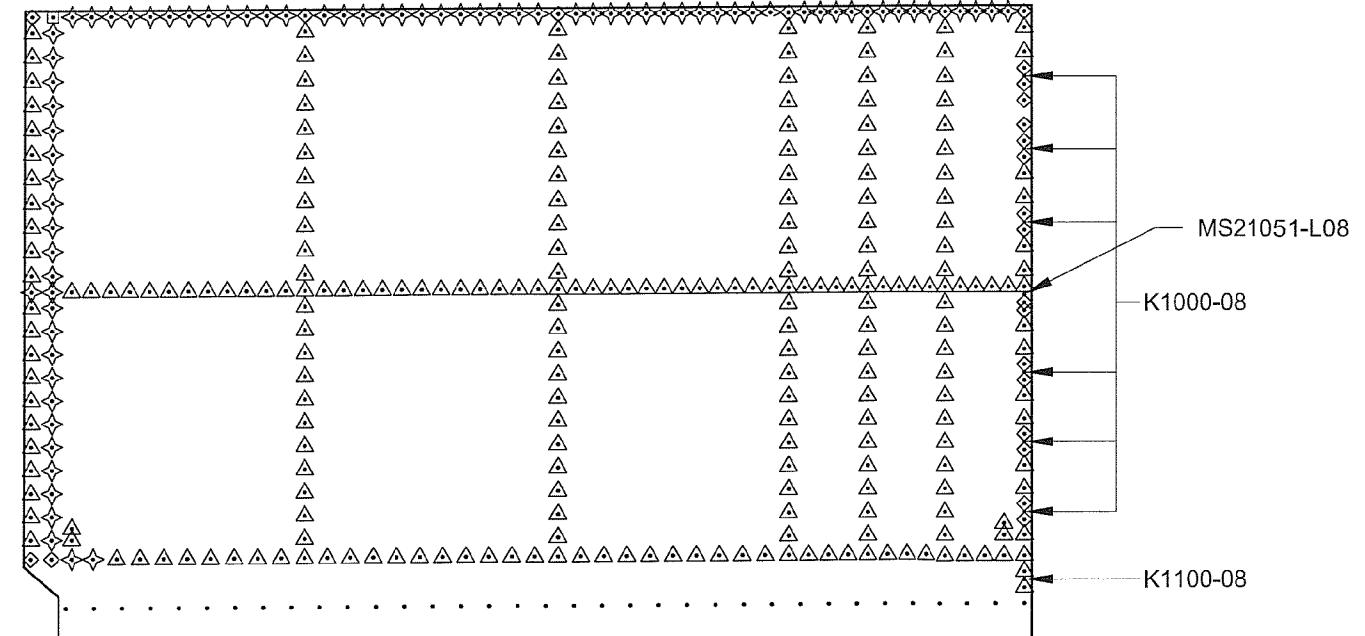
TOP INBD WING SKIN RIVET CALLOUT
